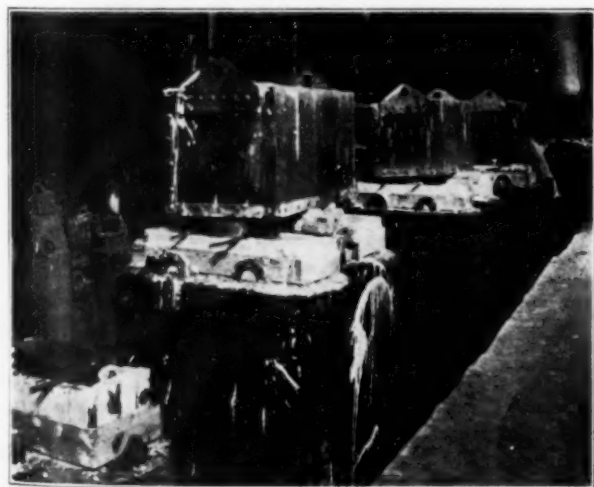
MOLD SET-UP SHOWING BOX POURING OF 48 X 21-IN. (19,000-LB.) NICKEL-STEEL INGOTS
